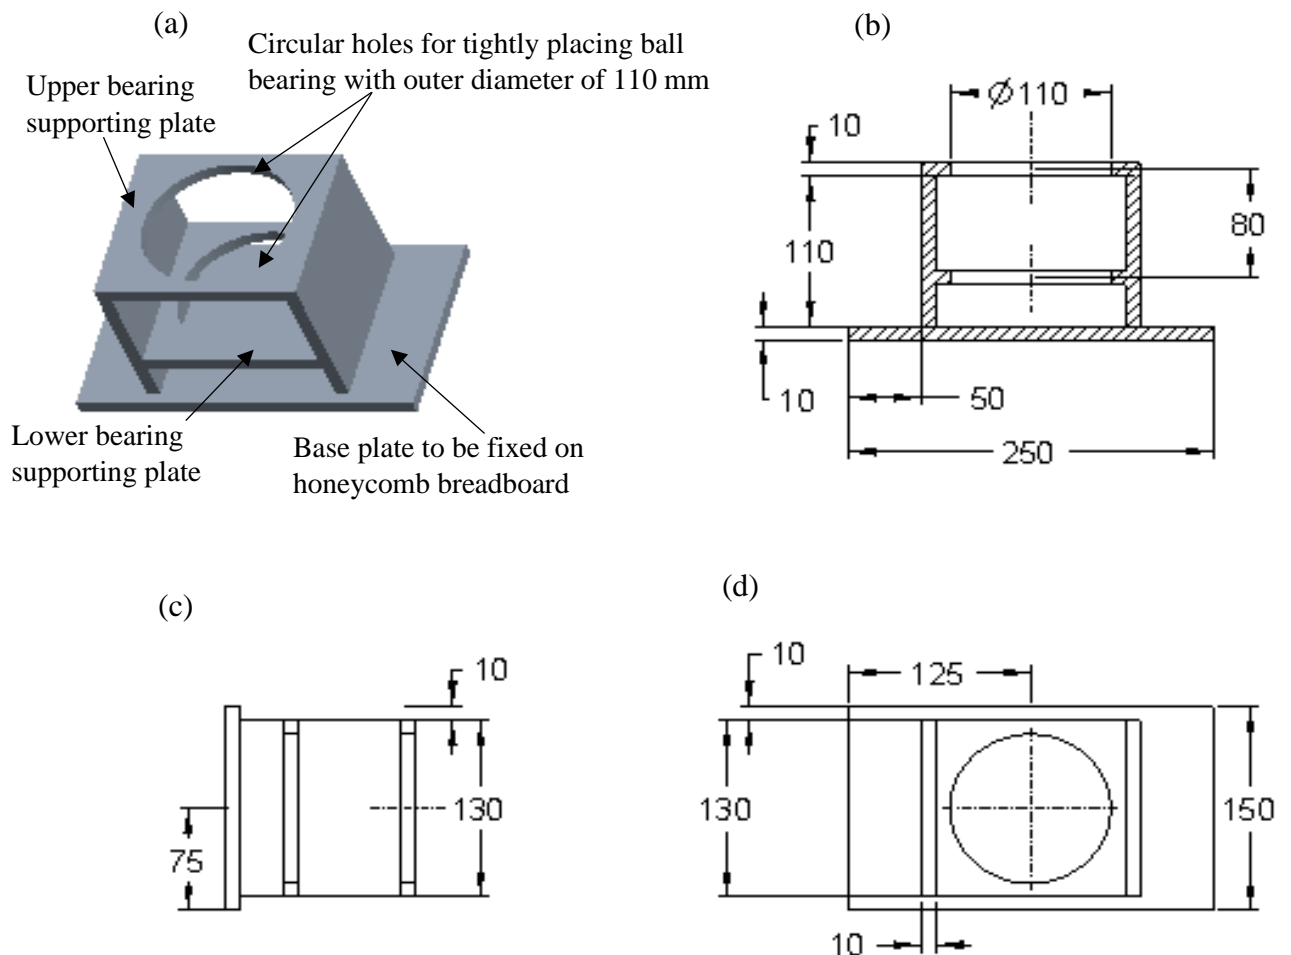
(a) Three-dimensional CAD model, (b) sectional front view, (c) projected side view, and (d) projected top view of the fixture used for holding and rotating the cylindrical workpieces.
